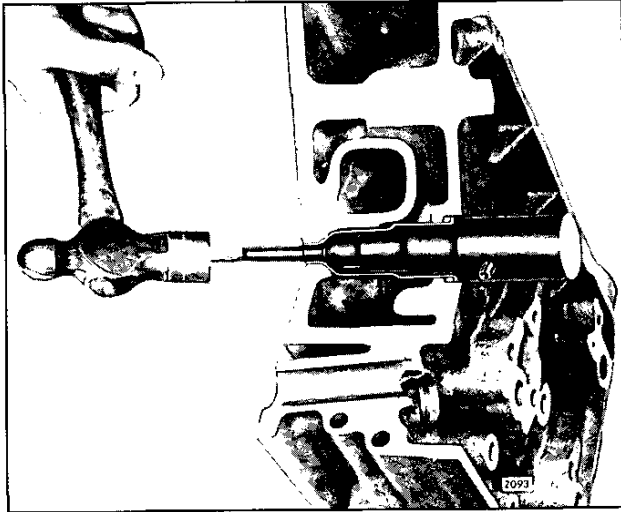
Removing Injector Tube Using Tools J 5286-4A and J 5286-5
